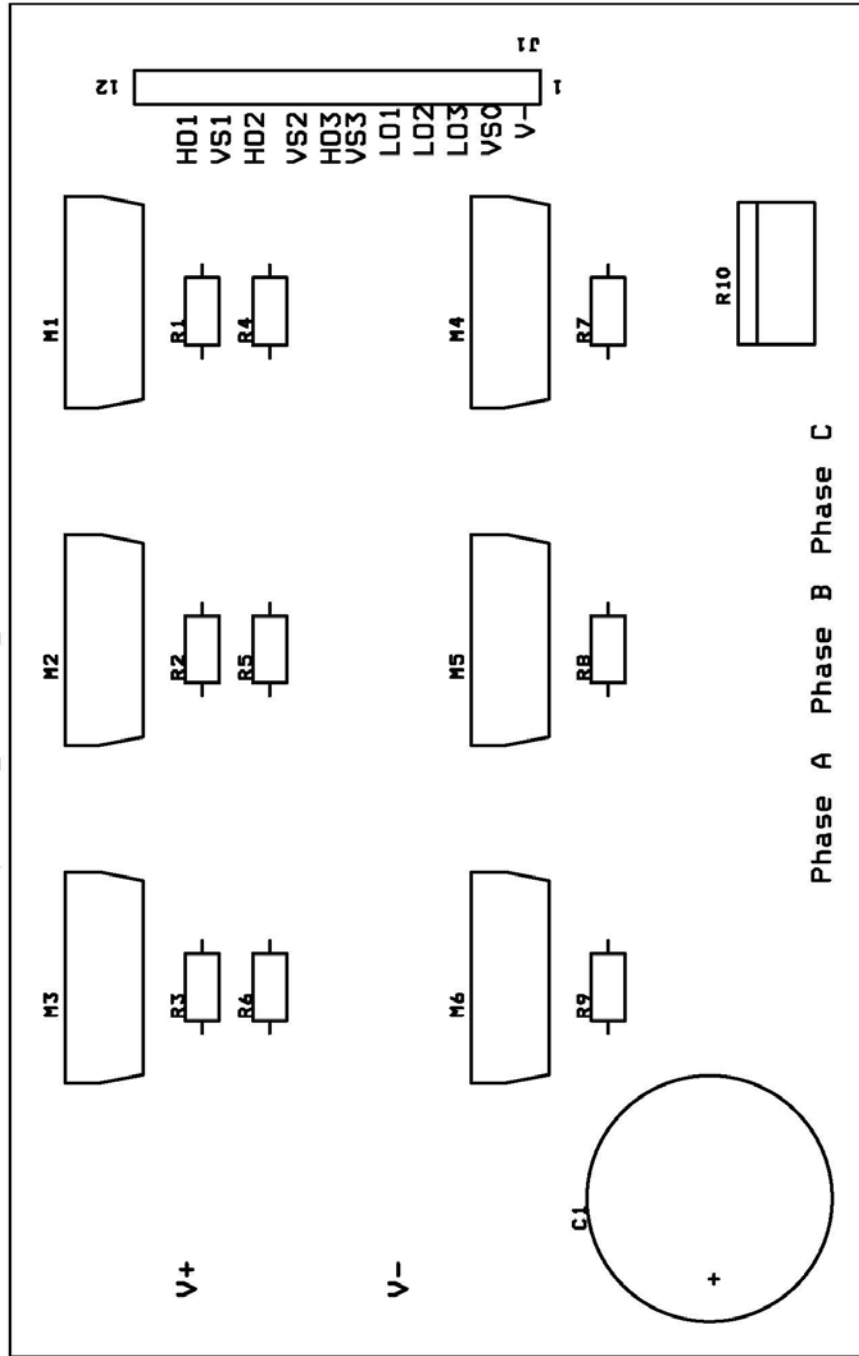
Drilling pattern for power board PCB of 3-phase inverter.
